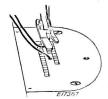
A. THREADS IN POSITION TO COMMENCE SEWING
